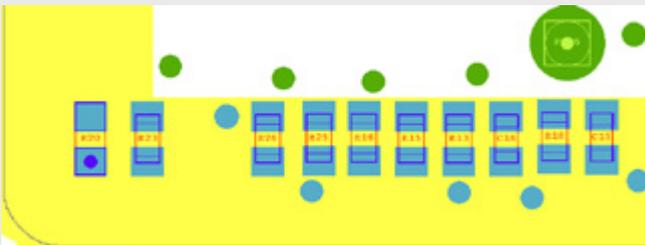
fiducials (markings, red) which are too close to the edge of the pcb, remaining concealed in the placement machine whilst the pcb is being held. They are unusable as a reference point, as a result of which the placement accuracy of the machine diminishes
